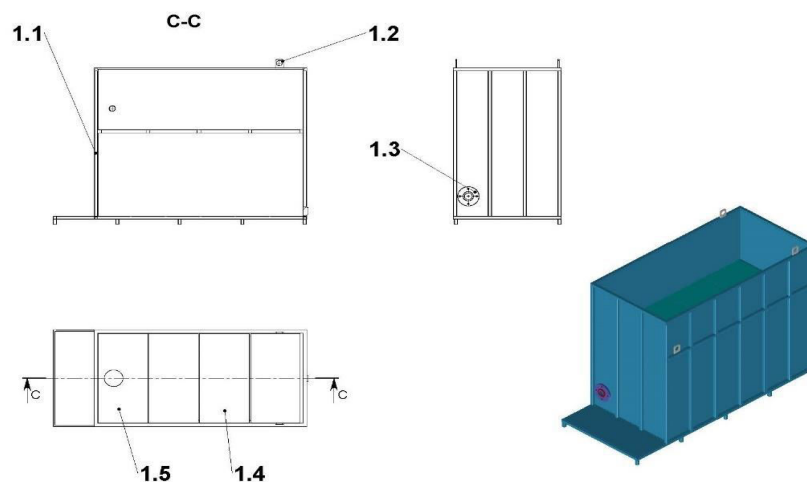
Assembly-mounting drawing and isometric view of the water tank
